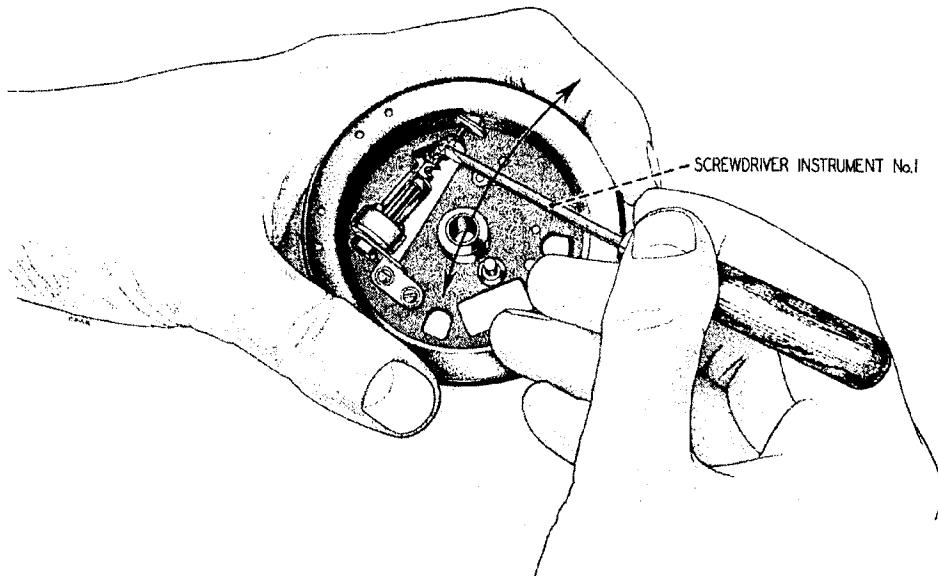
TESTING THE GOVERNOR FOR SMOOTH RUNNING
